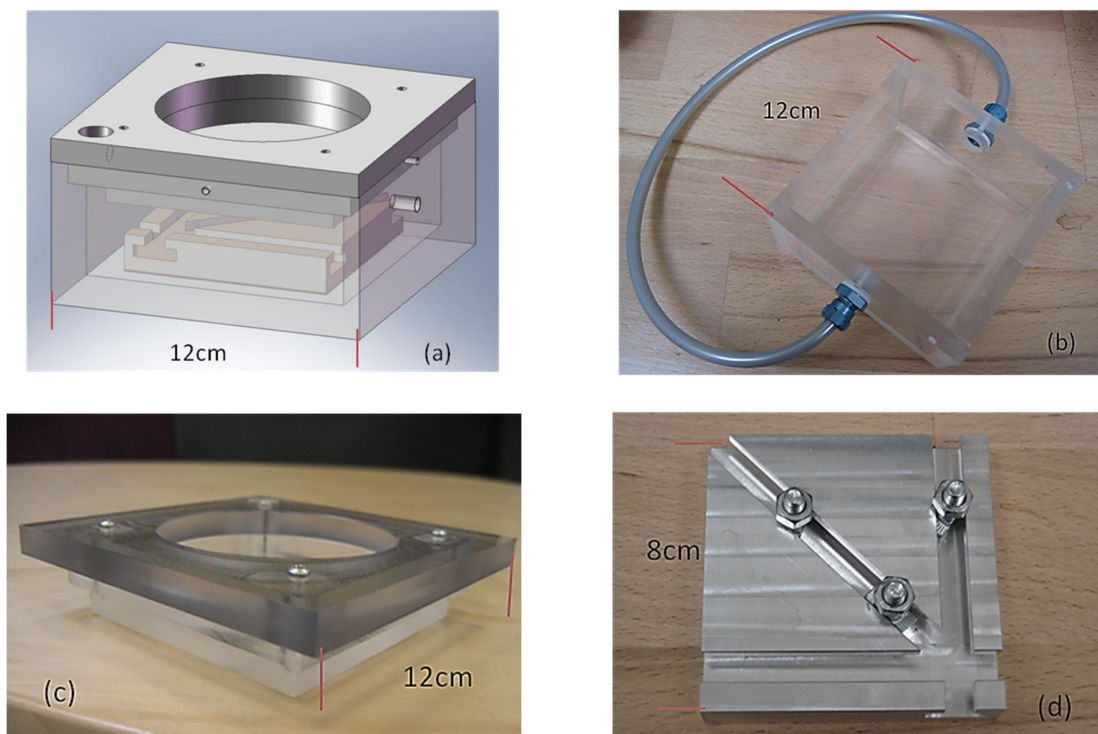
The chamber with a fixture to hold samples during laser machining. (a) Assembly of the chamber, fixture, and lid (b) chamber made by PC, the pipe can be used to connect other components such as pump or filter (c) the lid, on the bottom later a special glass window is installed (d) the aluminum fixture, the three screw head are used to fix polymer plates
